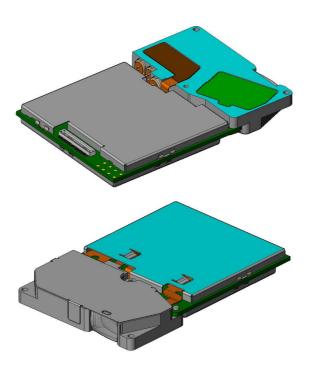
Heat dissipating surfaces of PSE. Shown in blue are IPM housing bottom and EPM top shield.
